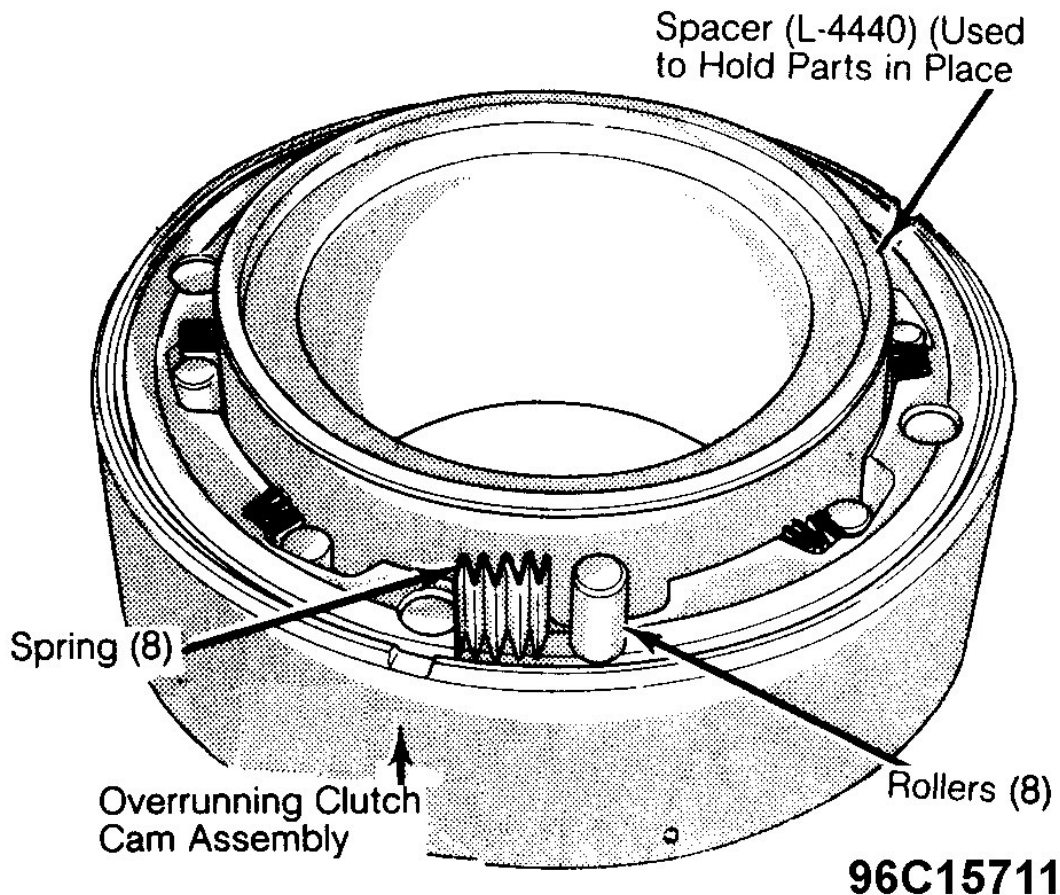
Installing Rollers & Springs in Overrunning Clutch Cam Assy.
